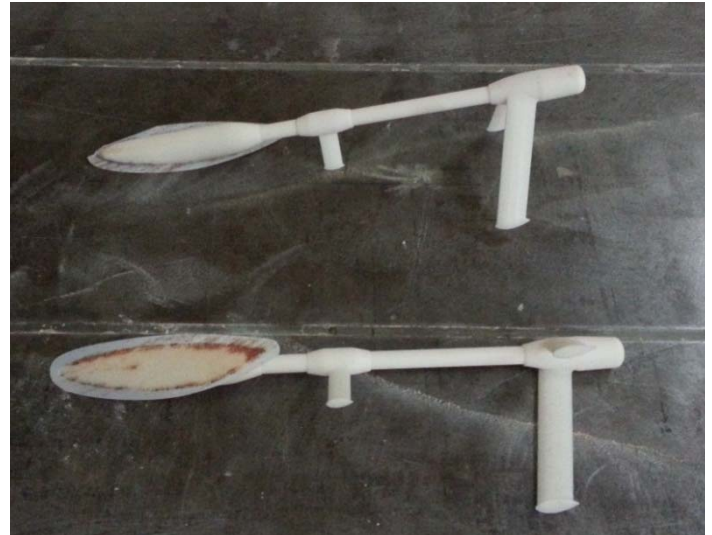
Shaft, barrel, strut and stern tube system (3D Printer used).
